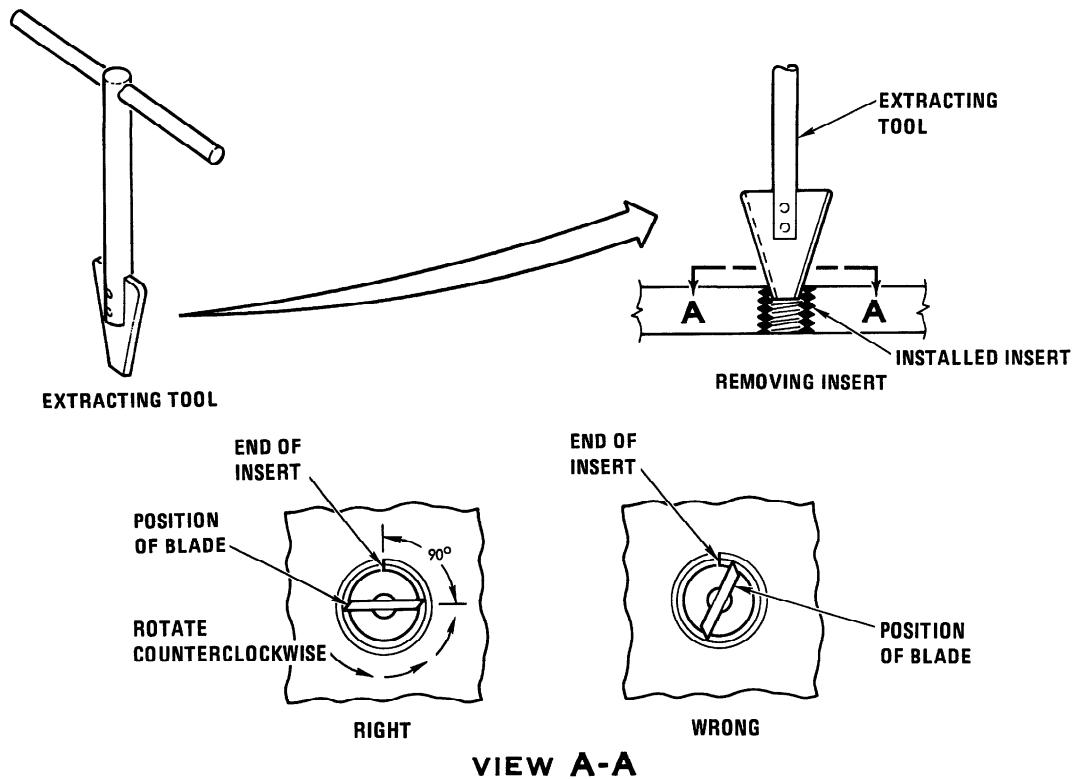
Helical Coil Insert Installation (Sheet 2)
